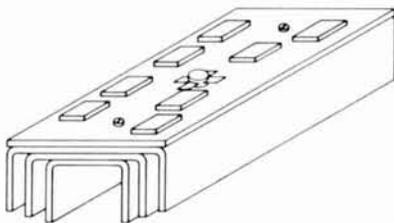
Printed-circuit board and heatsink mounting details. Mounting pads for components are made of PC board material.
